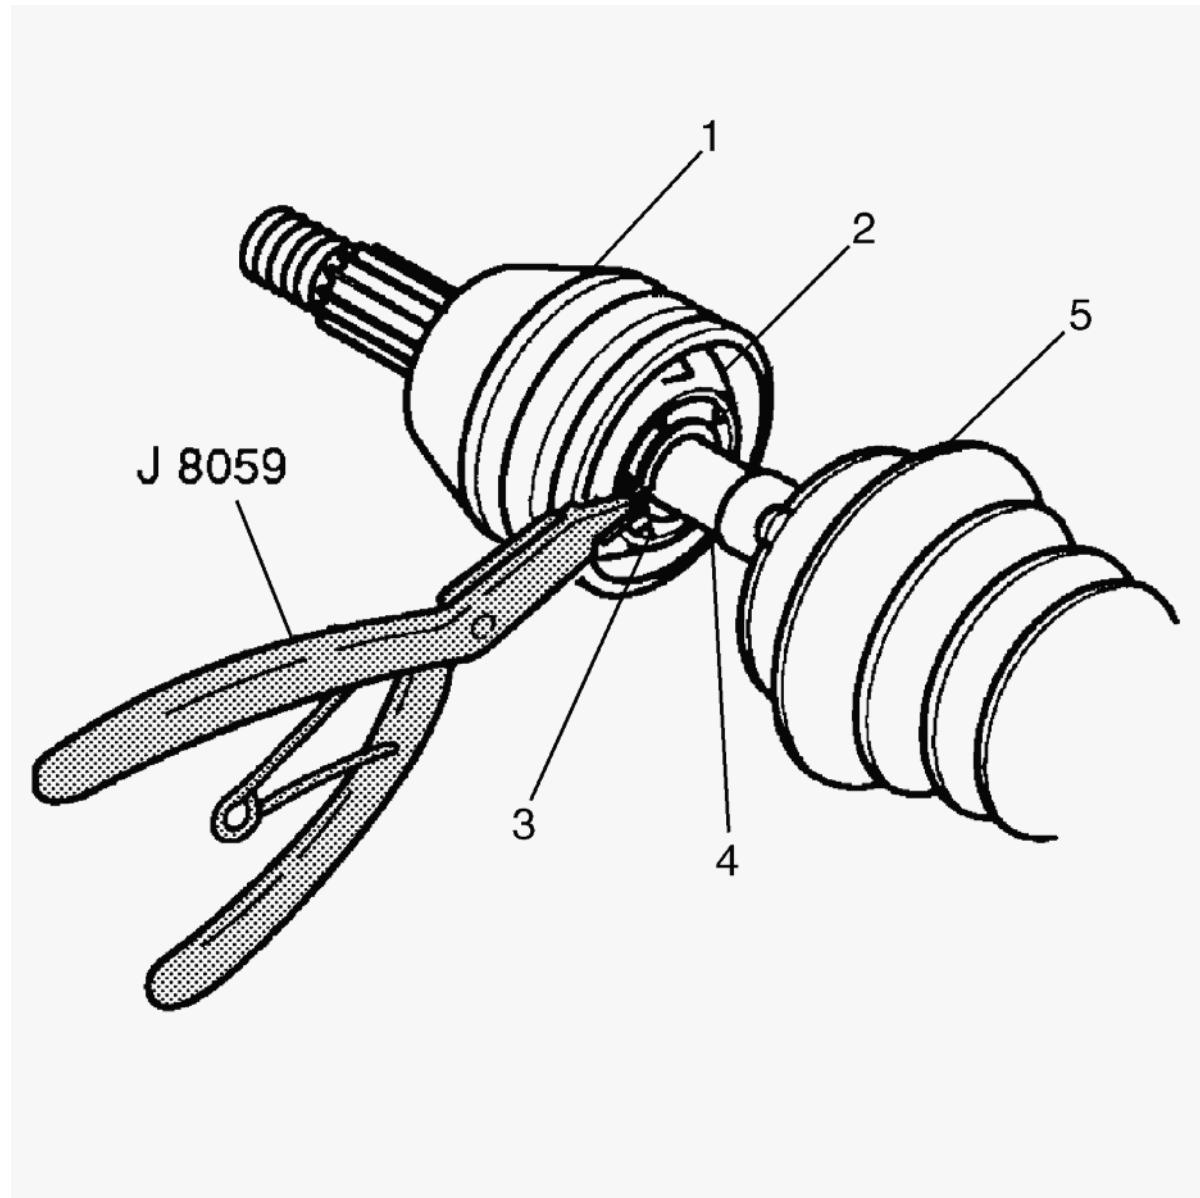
Boot, Halfshaft Bar And CV Joint Outer Race
